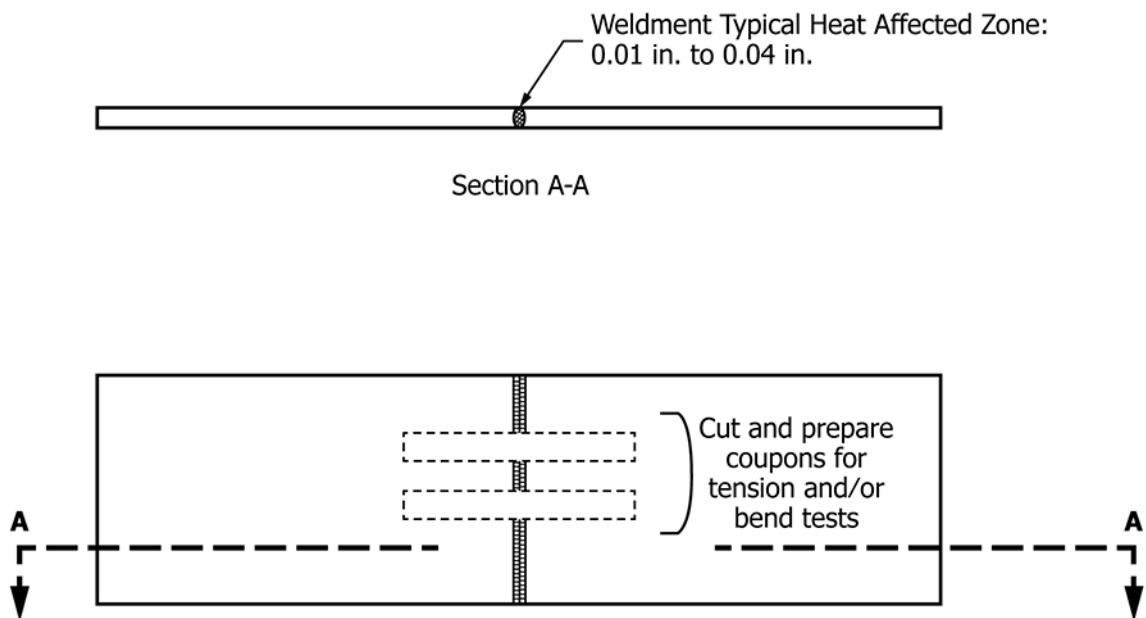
Butt-welded Test Pieces Are Laser or Laser-Hybrid Welded and Then Subsequently Machined Into Tensile Test Bars and Root-bend Test Specimens (Not to Scale)
